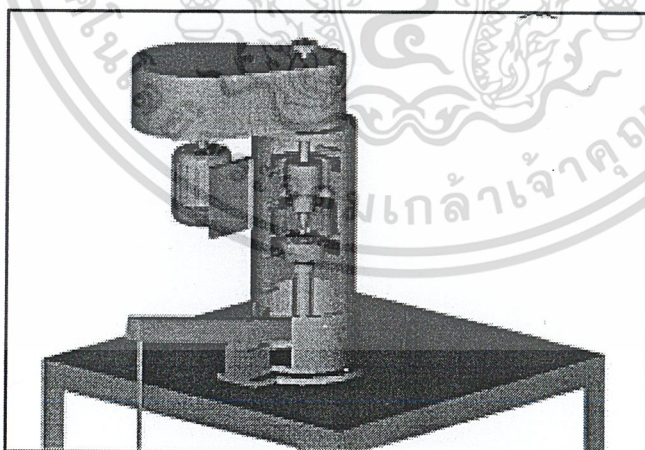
Four-ball Test with main dimension (All Dimension, mm)
